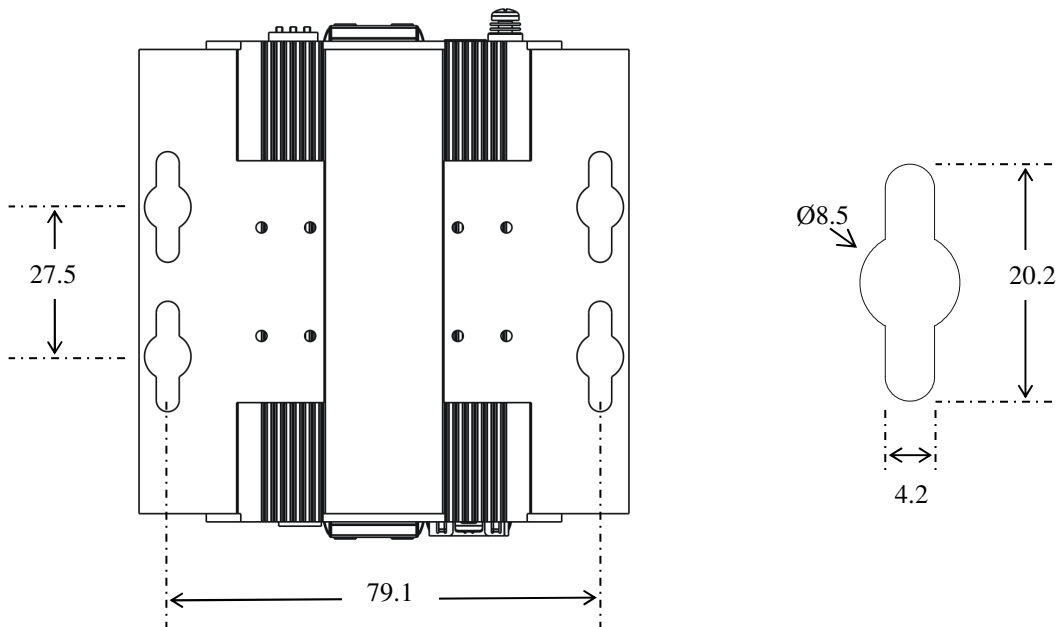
OSD2154P MOUNTING DIMENSIONS
